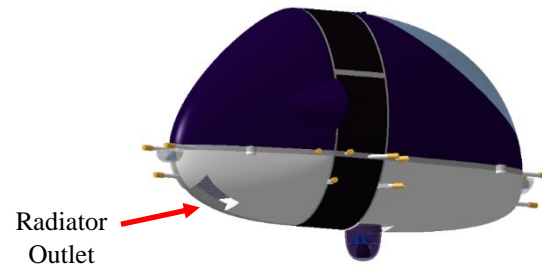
Rear view of the fuselage with the radiator outlet highlighted.
